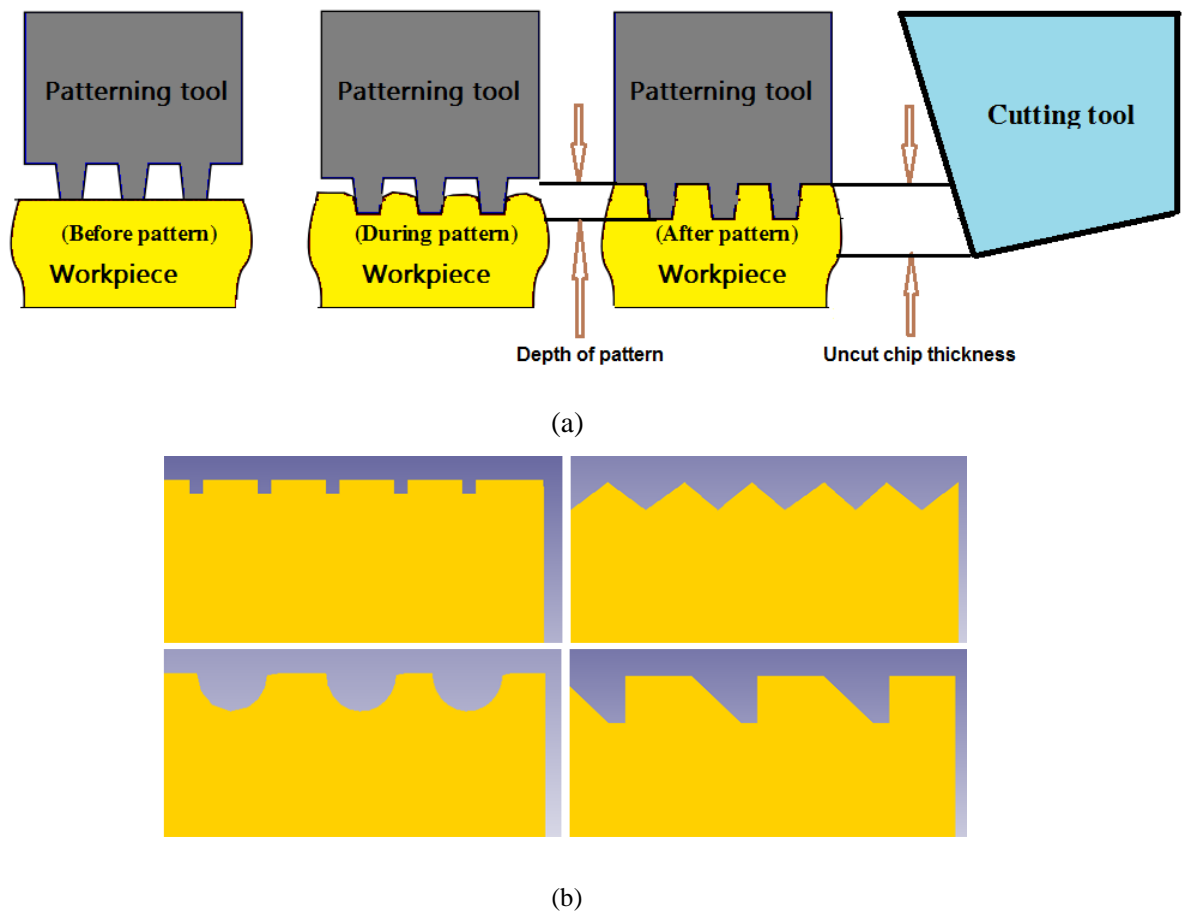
(a) Patterning on a workpiece (b) Examples of patterns used to generate surface discontinuities on a workpiece
